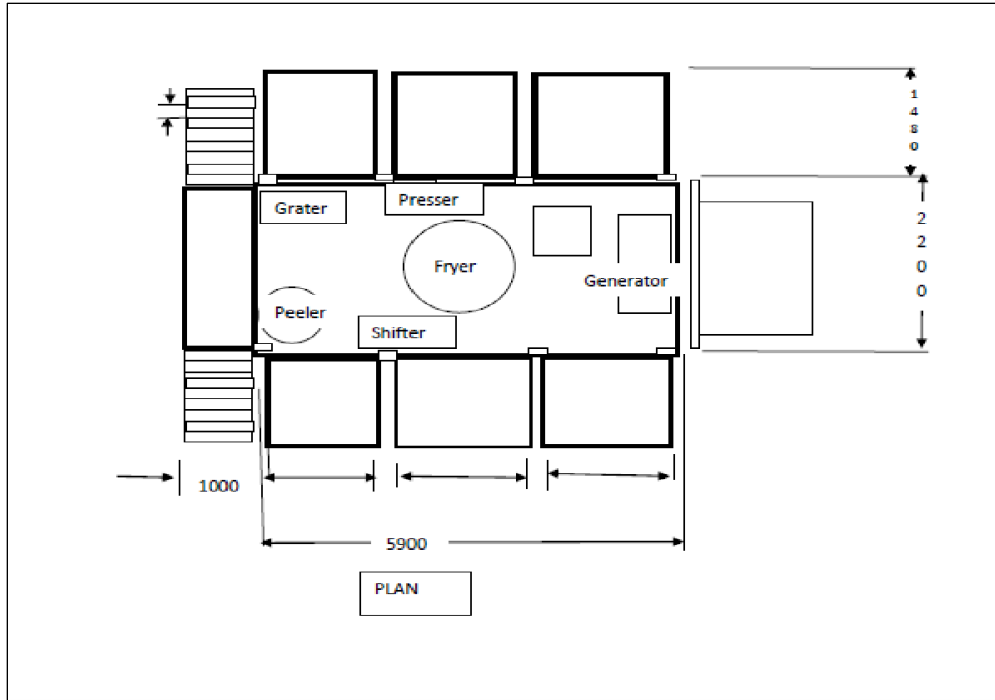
Equipment Layout on the Cassava Compact Truck (Plan view)
